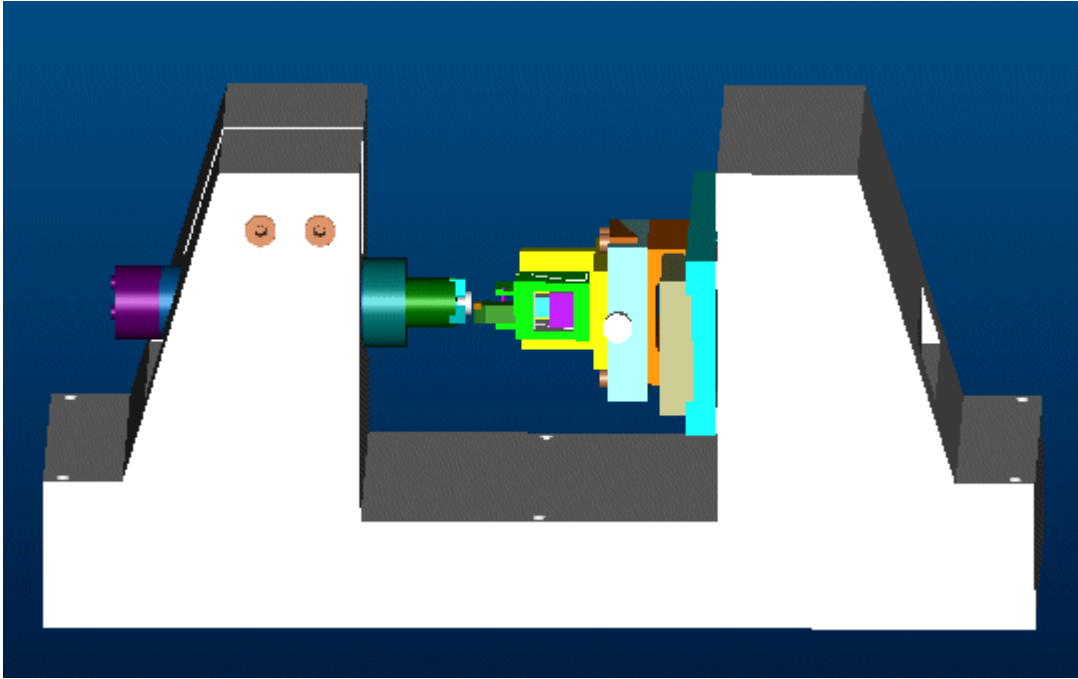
Layout of a bench type ultraprecision machining tools for nanometric cutting.
